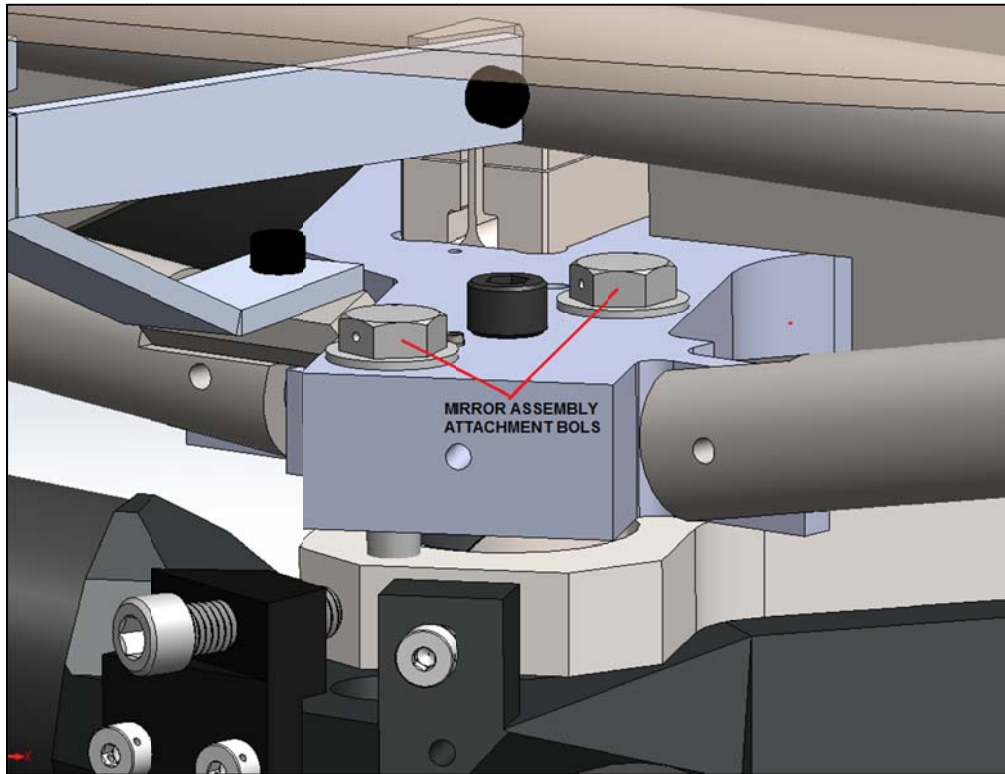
Off axis Mirror Assembly attachment HW. Bolts are drilled head for safety wire after final alignment.
